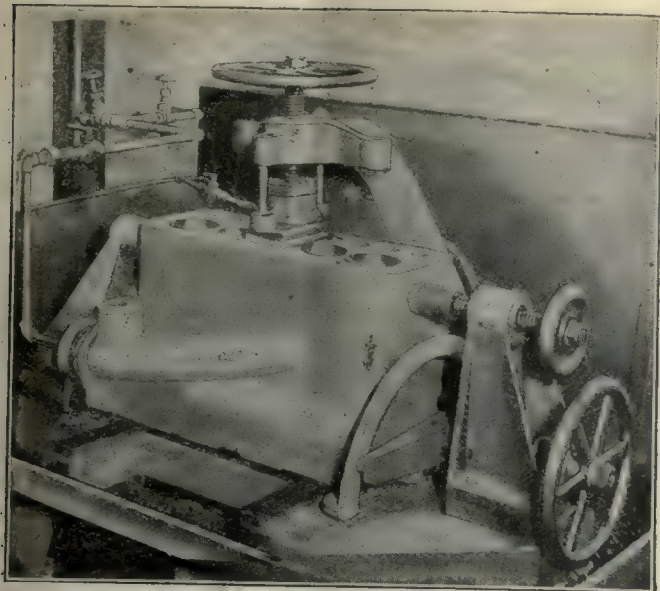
THE FIXTURE FOR WATER TESTING THE CYLINDER BLOCK
